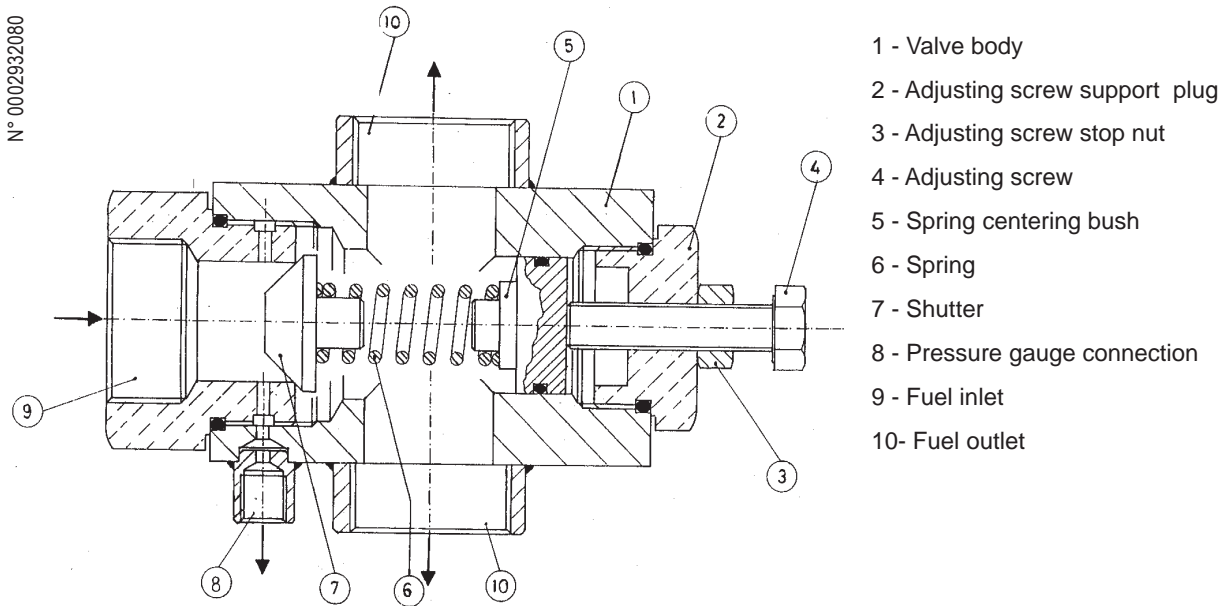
### DETAIL OF FUEL PRESSURE ADJUSTING VALVE
